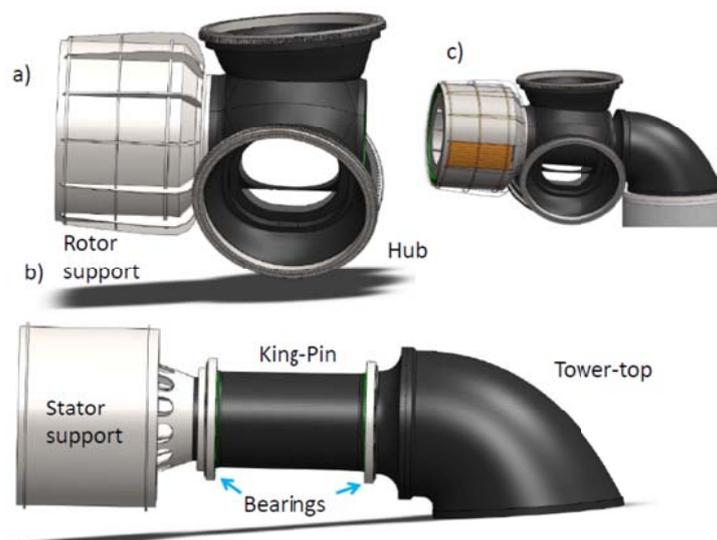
Illustration of main components of the King-Pin nacelle layout with a front mounted direct drive generator. a) Rotating part of the nacelle: The generator rotor support structure (left) is connected directly the hub (right) holding the pitch bearings for the blades. b) Static nacelle parts: The generator stator support (left) is connected to the King-pin (centre) supporting the hub with two main bearings and is connected to the tower-top (left). c) Combined king-pin nacelle layout.
